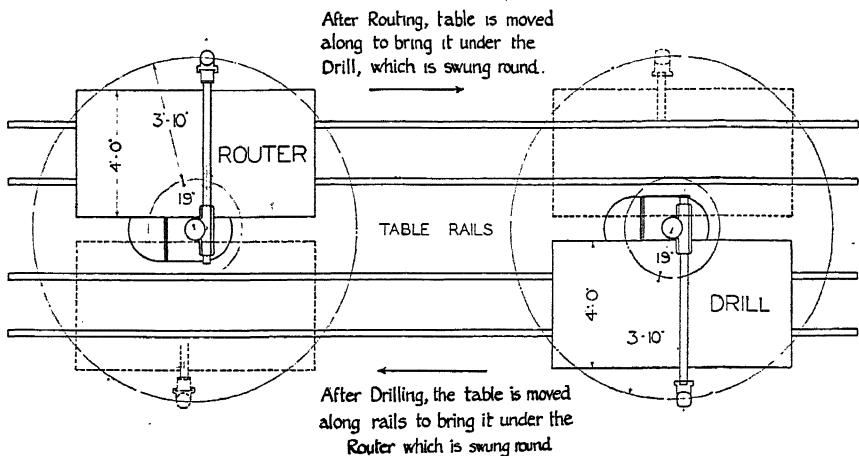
DIAGRAMMATIC LAYOUT OF RADIAL ARM ROUTING AND DRILLING UNITS FOR DURALUMIN SHEETS. (Wadkin Ltd.)
